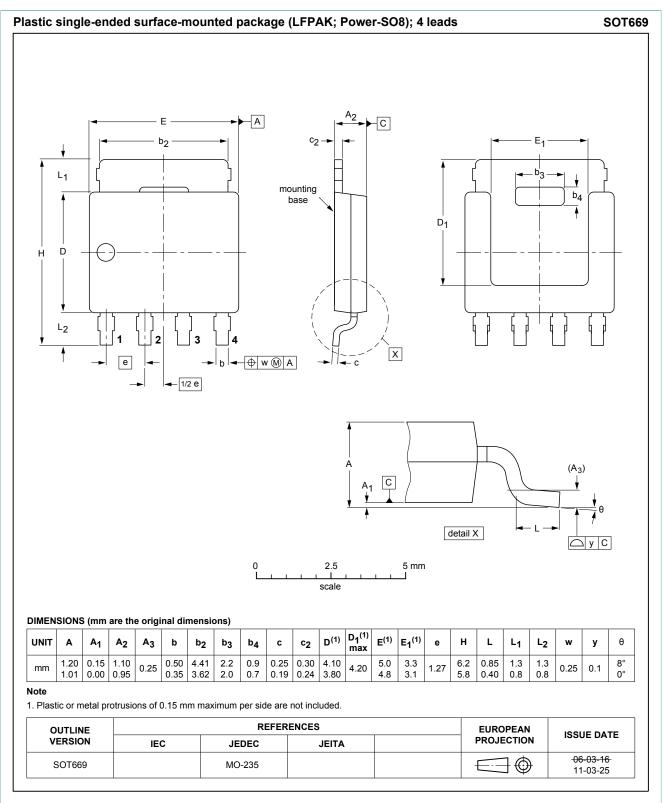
Package outline LFPAK; Power-SO8 (SOT669)
